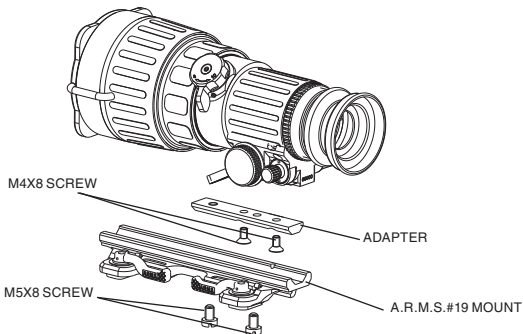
ASSEMBLING PS-22 WITH A.R.M.S. MOUNT
